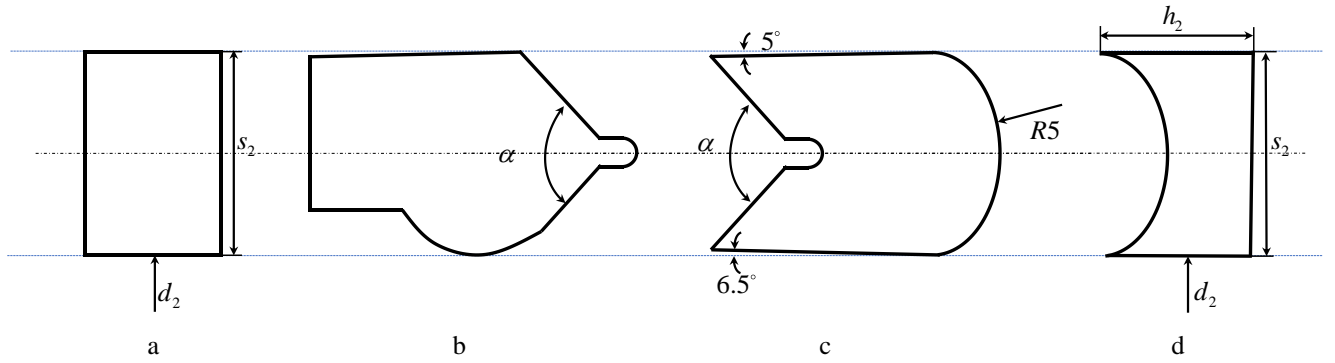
Plane detail drawings of hydraulic end three-stage sealing device: a) Support ring; b) Rubber ring; c) Rubber ring; d) Packing gland nut
